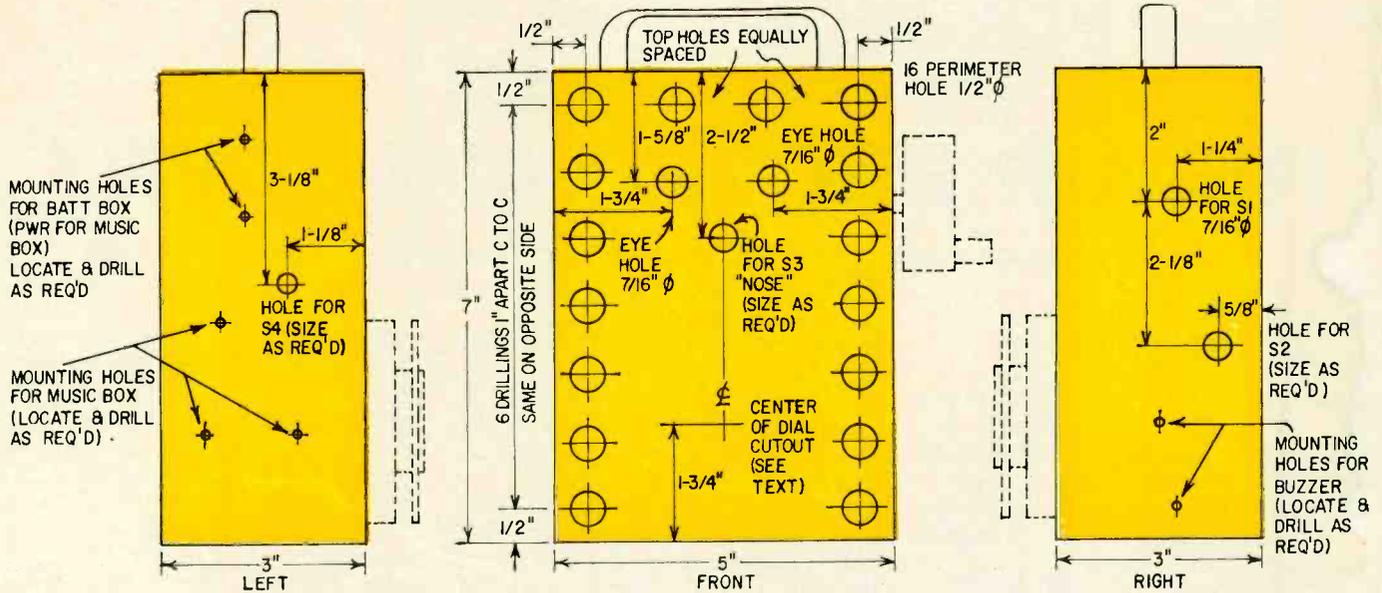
How to lay out the chassis box. Exact hole sizes and positions depend on particular parts used. Better have them on hand before you pick up the drill!
